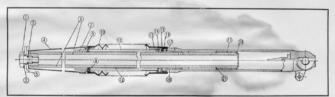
B Front cushion [\$ 90, CL 90, CL 90 L, CT 90 (from F. No. 000001 A)]
